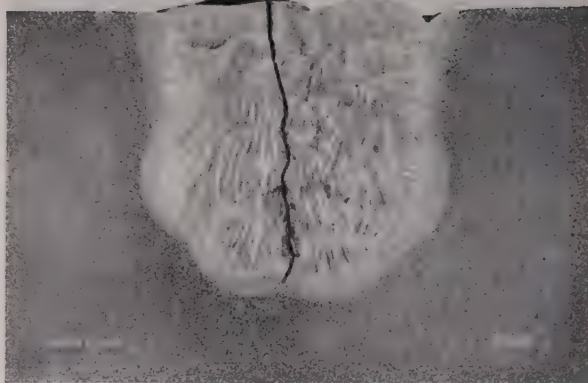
Seam welded at a pre-heating temperature of 350 °C
